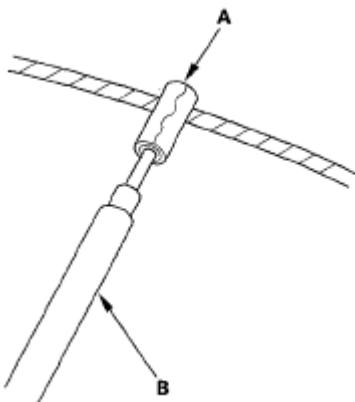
Identifying Aluminum Foil And Tip Of Tester Probe
